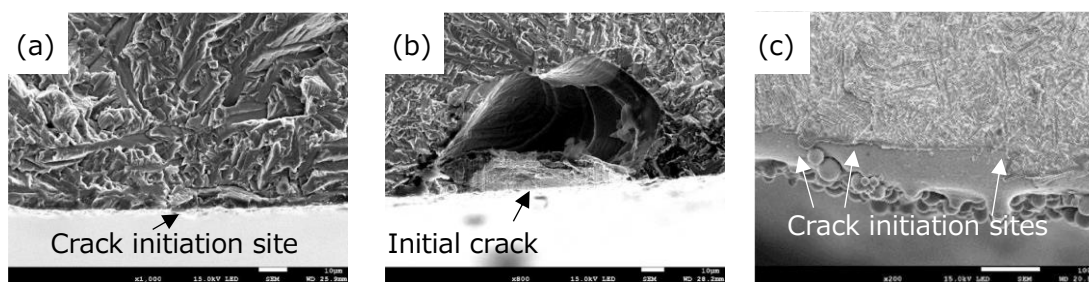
Fatigue fracture surfaces. (a) HIP+Machined(HIP-M/C), (b) Low energy + Machined (LowE-M/C) and (c) Baseline- As-built(As-buit). Arrows in the pictures indicates crack initiation sites.
